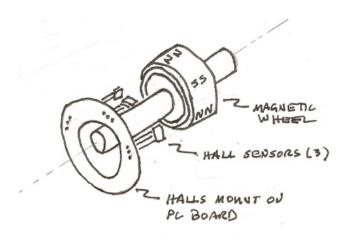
Typical Hall sensor and magnetic "wheel" assembly
